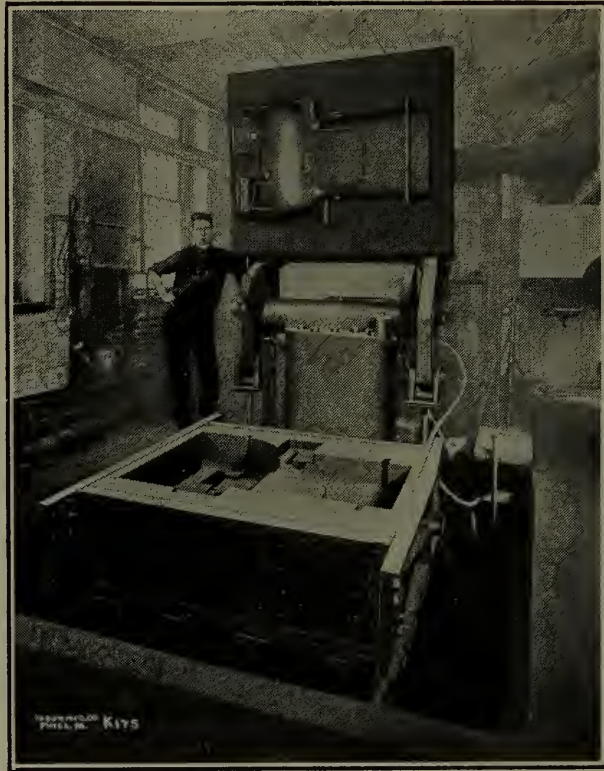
Grinder frame mold made on combined roll-over and jarring molding machine.
